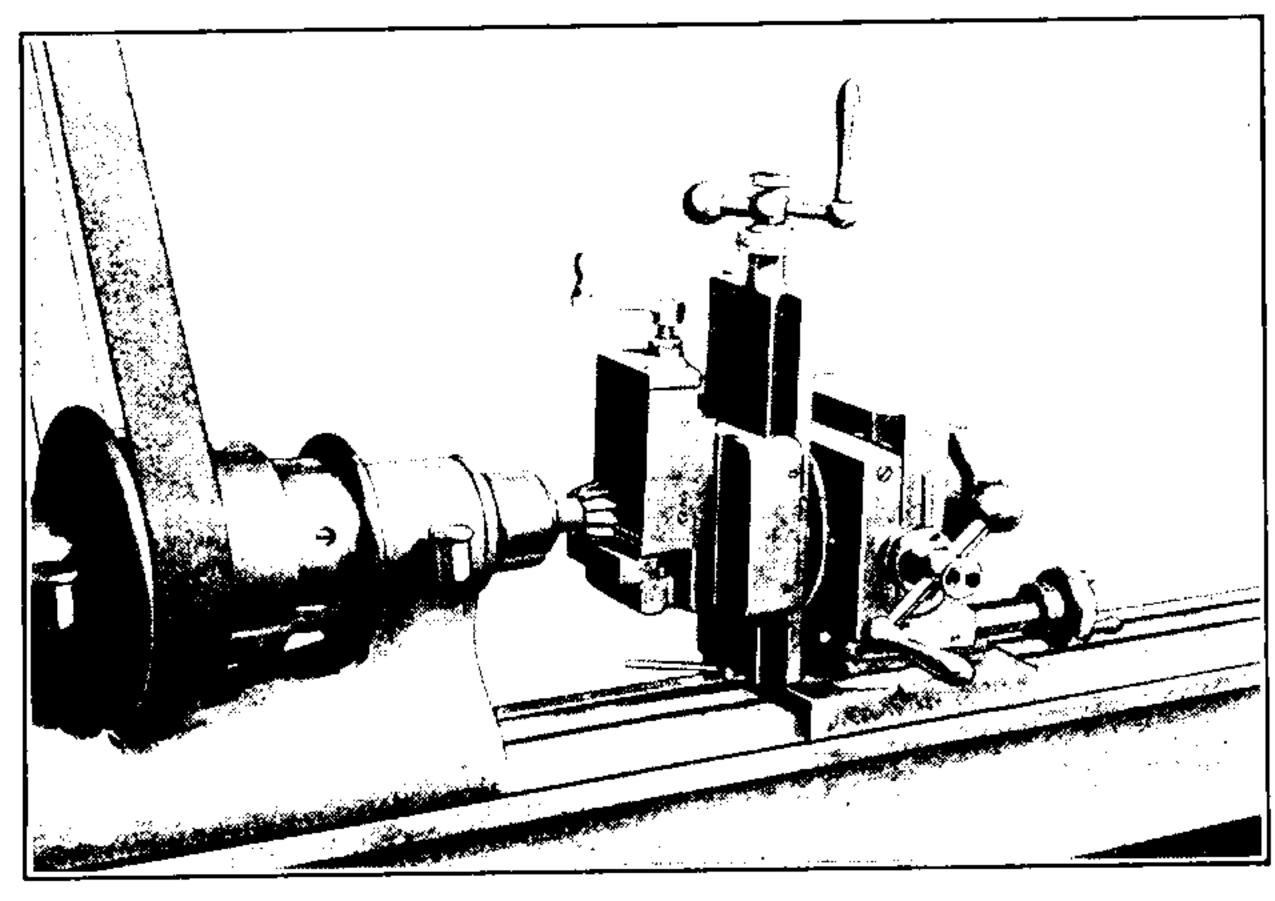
Milling Attachment with vise set as plain miller for milling dovetail
